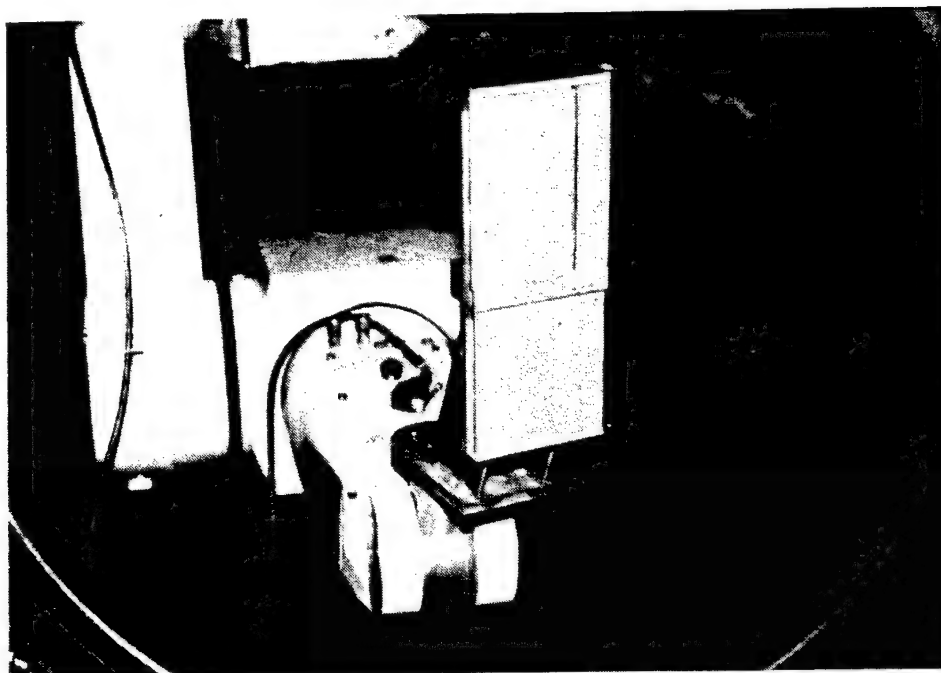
Wear and Corrosion Spray Fixture Mounted on Robotic Arm.
